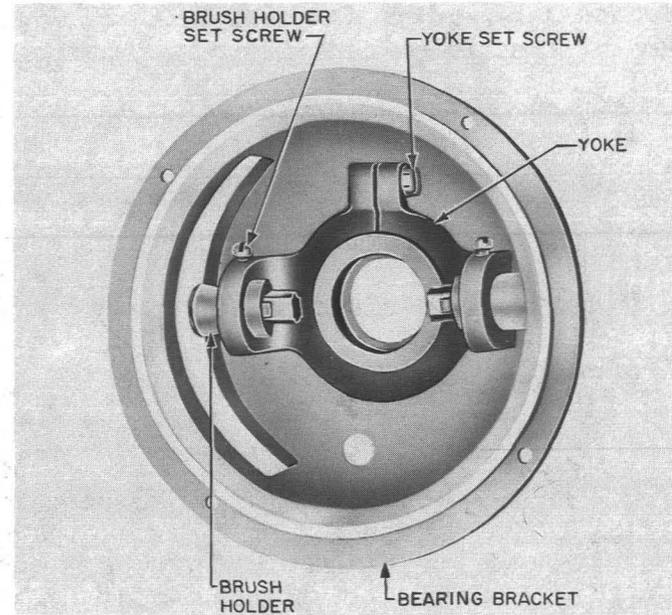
Adjustable Yoke of Electric Specialty Company Machine
